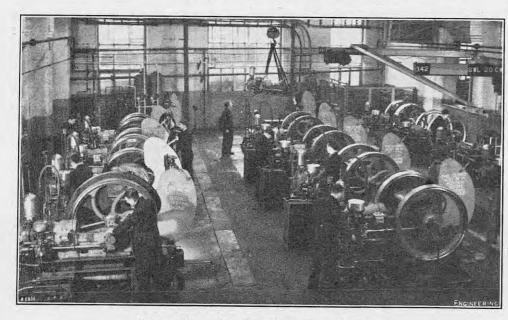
TEST BAY FOR HORIZONTAL ENGINES.
